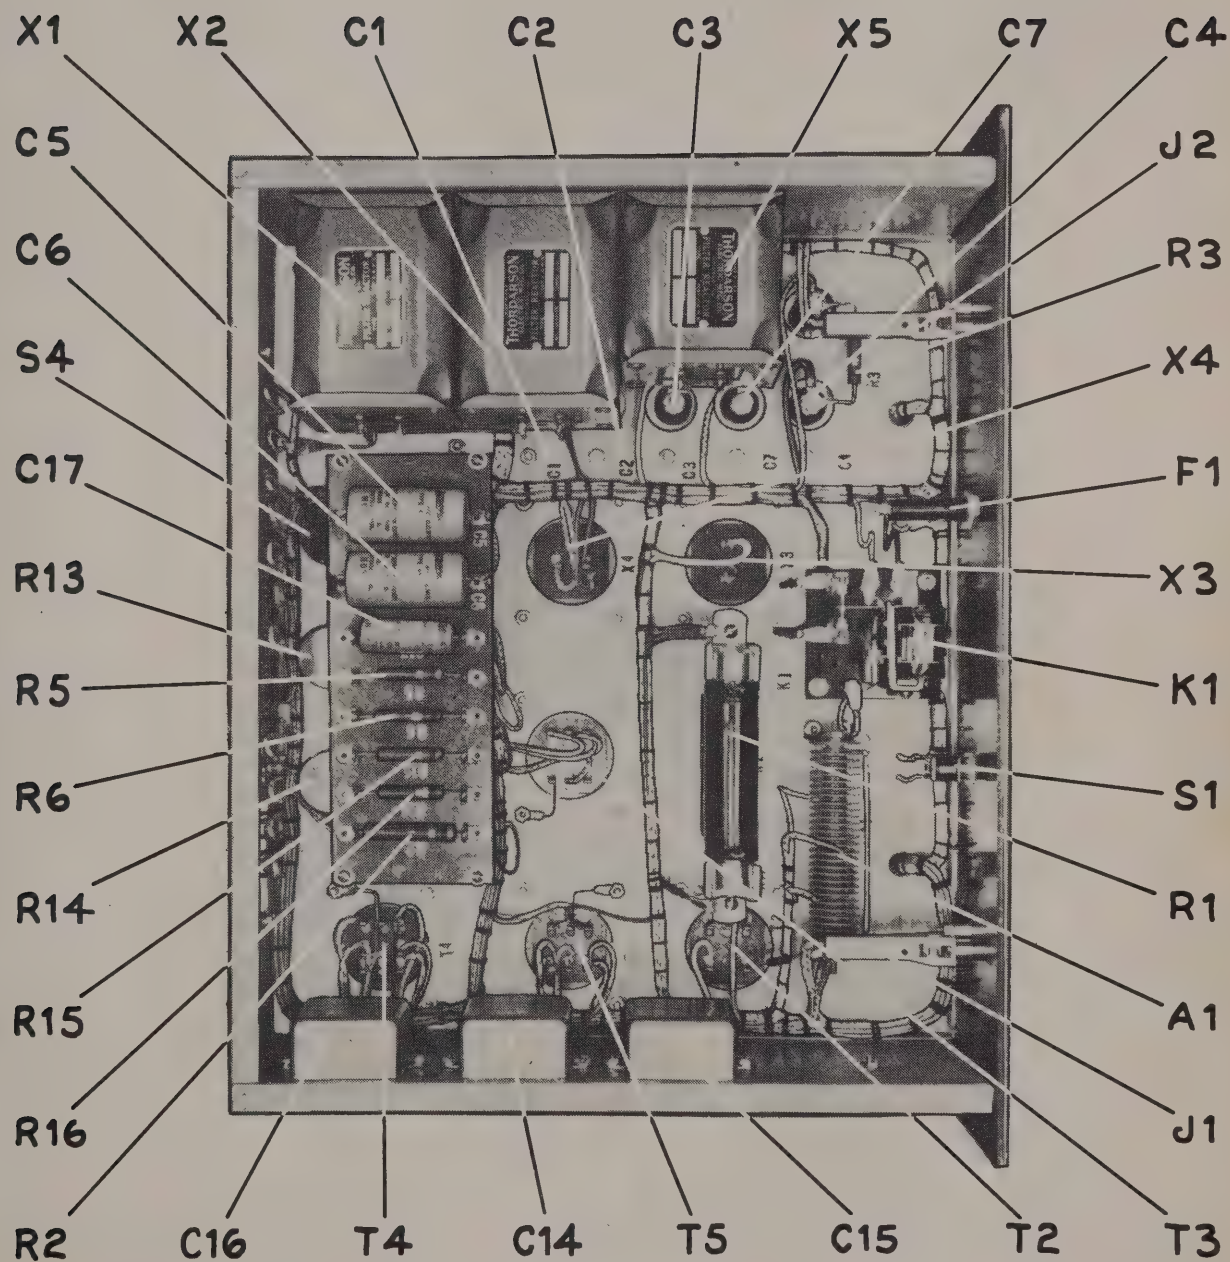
Remote Control Unit RM-22-D—Bottom View
